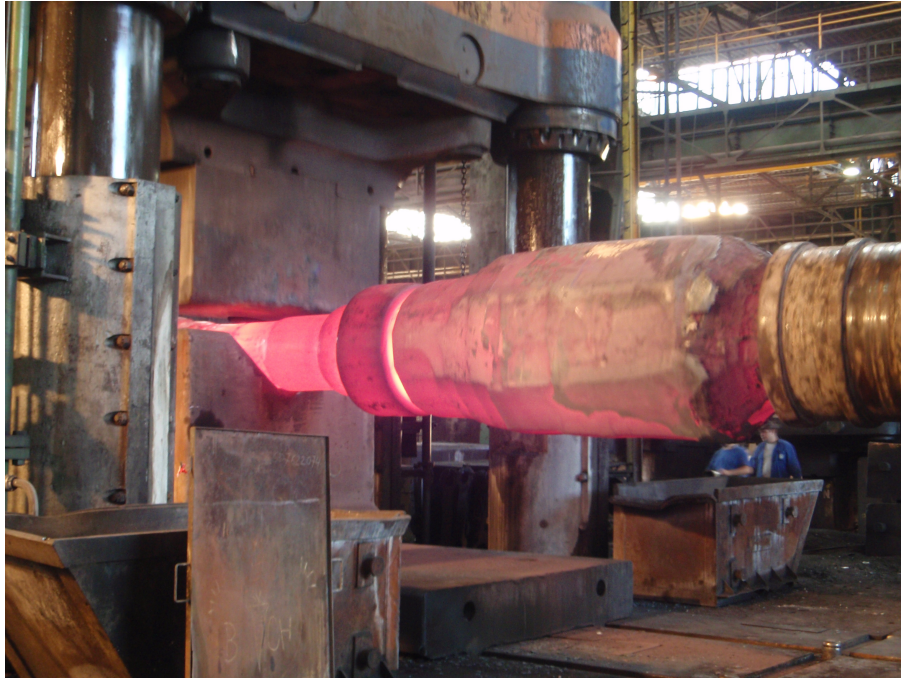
Forging of shaft using V-shaped lower die. Courtesy to Vitkovice Heavy Machinery A/S.
